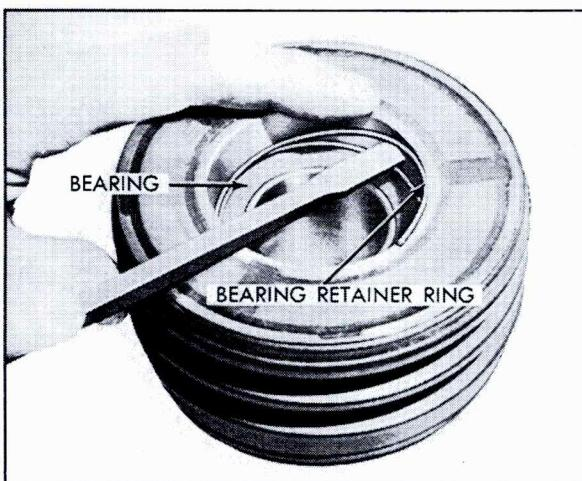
Removing Pulley Bearing Retainer Ring
